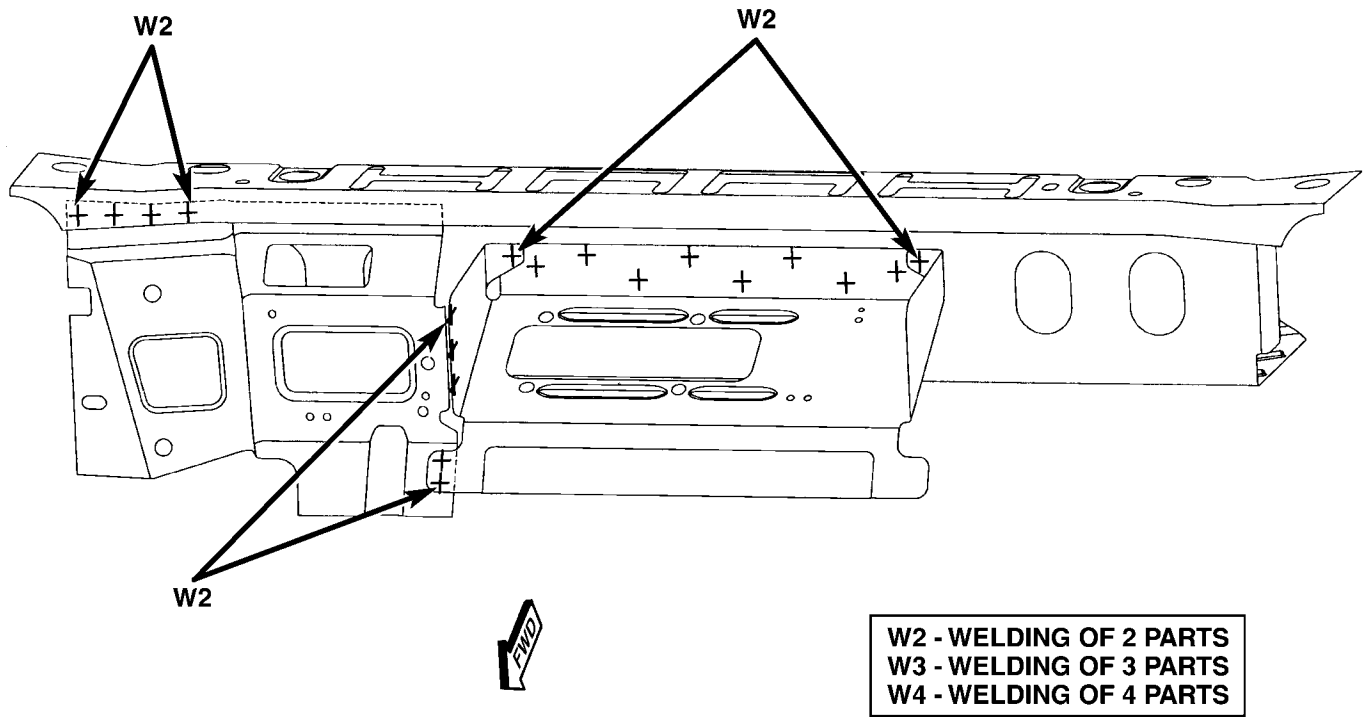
REAR WHEELHOUSE CROSSMEMBER SUPPORT AND REAR FLOOR PAN BRACKET TO SHOULDER BELT SUPPORT GUSSET
